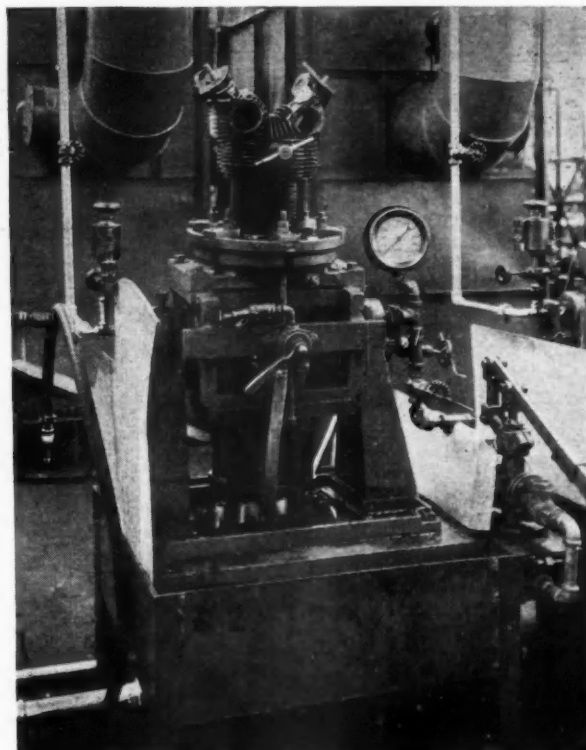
Water-testing cylinder barrel and head sub-assembly
